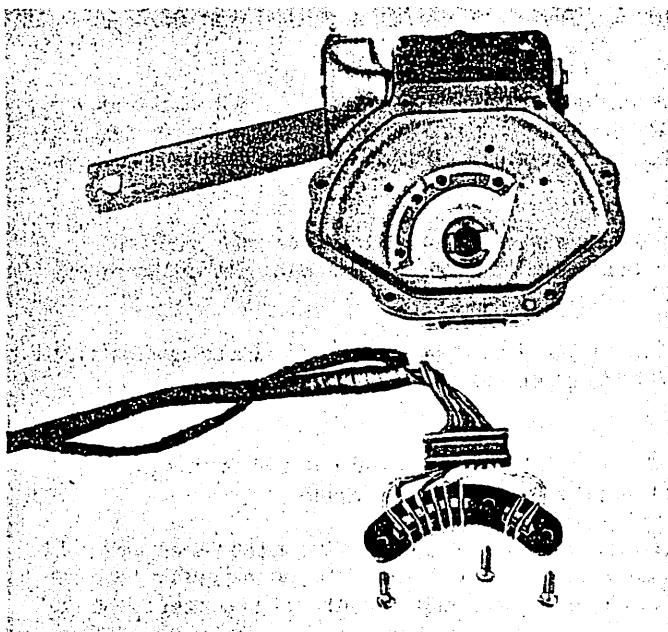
ACTUATOR WITH SWITCH PLATE REMOVED
